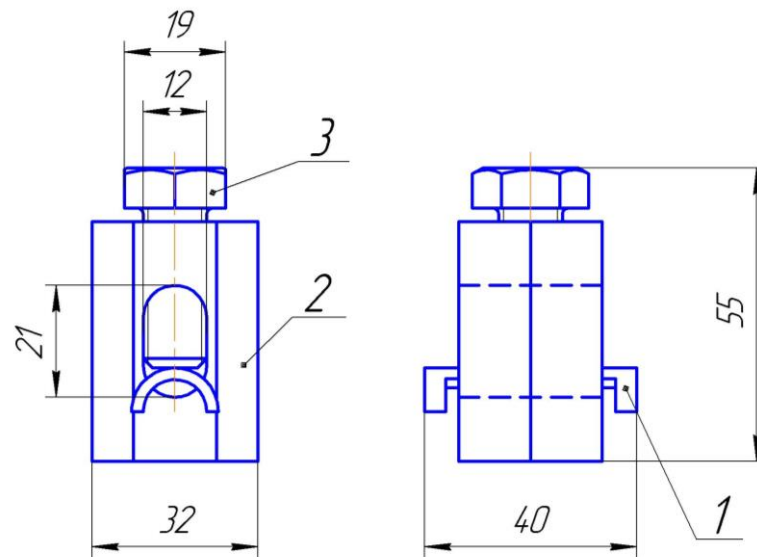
Terminal end with cable clamp for HV bushings.
